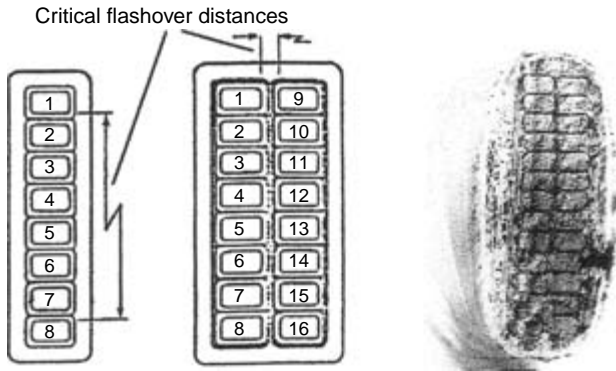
Multi-turn motor winding. (a) Single section; (b) Double section; (c) Taping in end-winding of failed 11 kV motor
